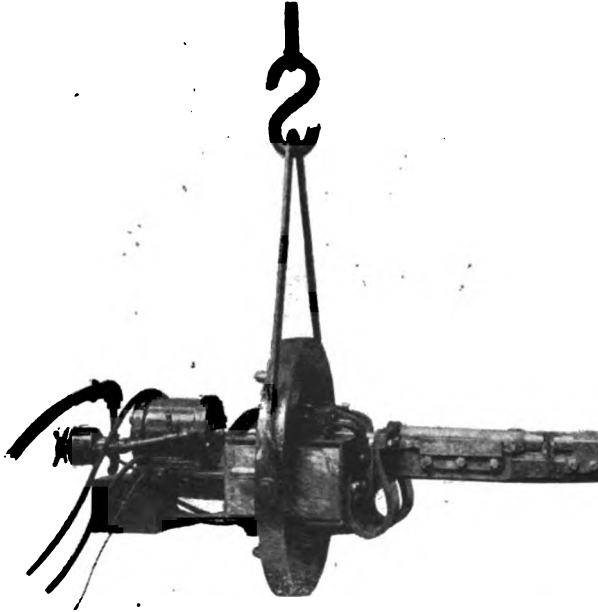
PORTABLE ELECTRIC WELDER FOR SPLICING OR INTER-SECTION WELDS ON SQUARE OR ROUND RODS
